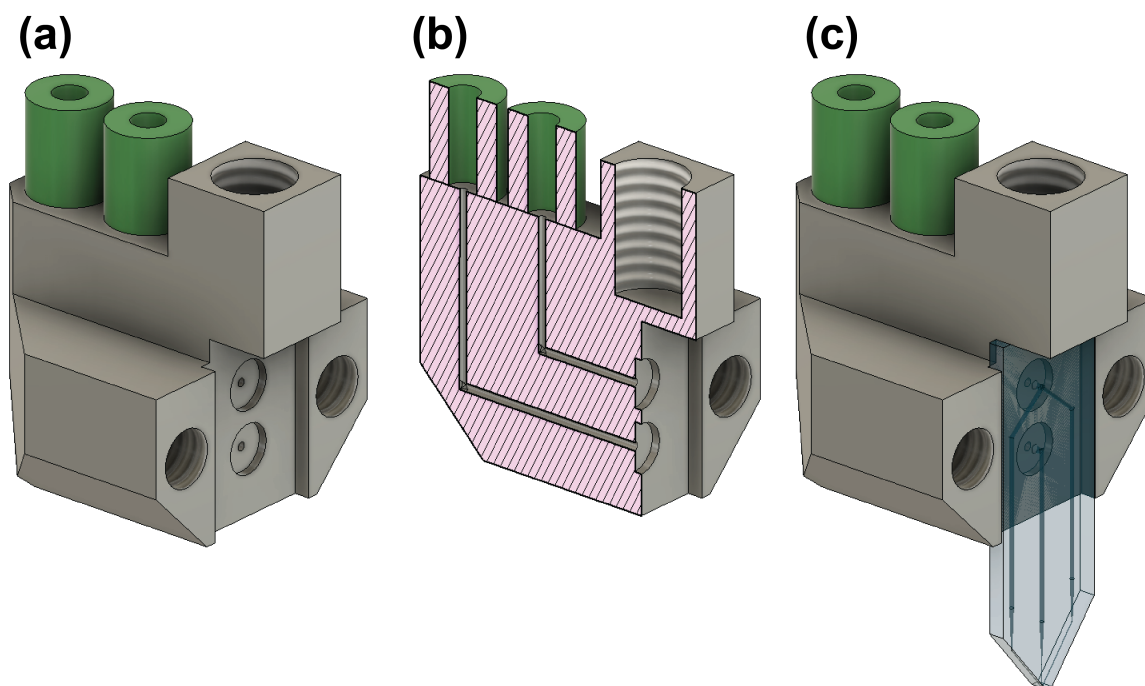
3D drawings of nozzle interface using Fusion 360. The part is shown as (a) the interface only, (b) its sectional view, and (c) combining with the chip nozzle where the clammer to hold the nozzle is not shown for clarity. Two o-ring grooves are designed to fit with size AS568-001 o-rings in order to seal the nozzle.
